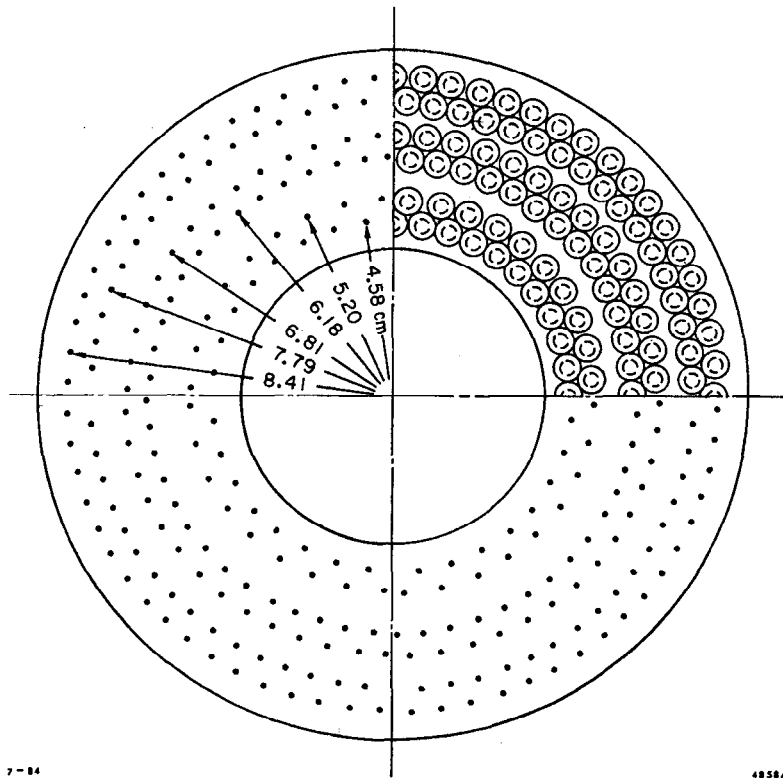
Spool Endplate Layout, Showing Placement of Straws in Radius and Azimuth.
